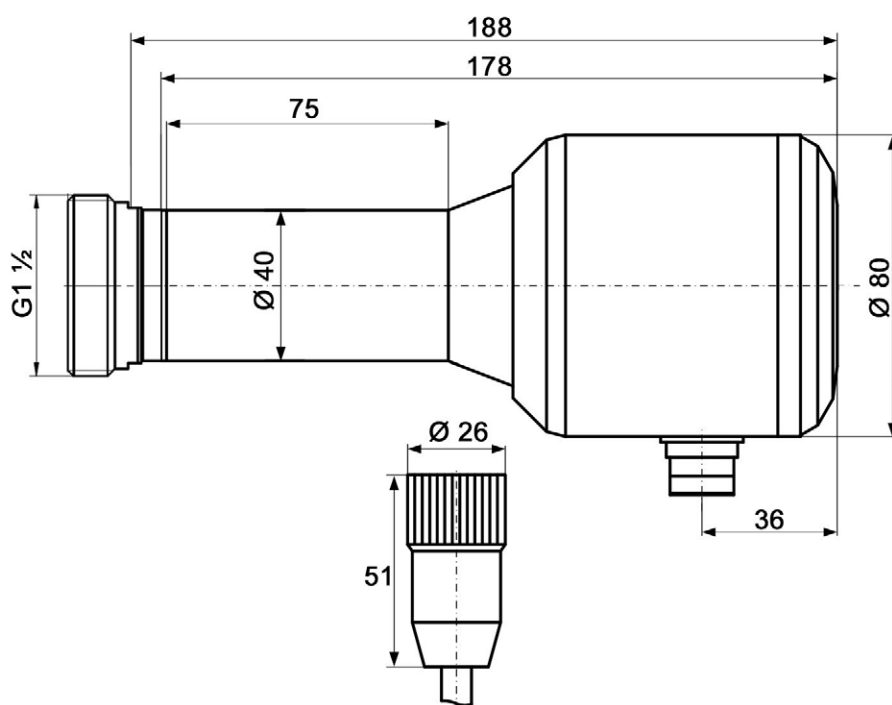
Dimensional drawing compact flame scanner F200K V, F200K Ex-II V
